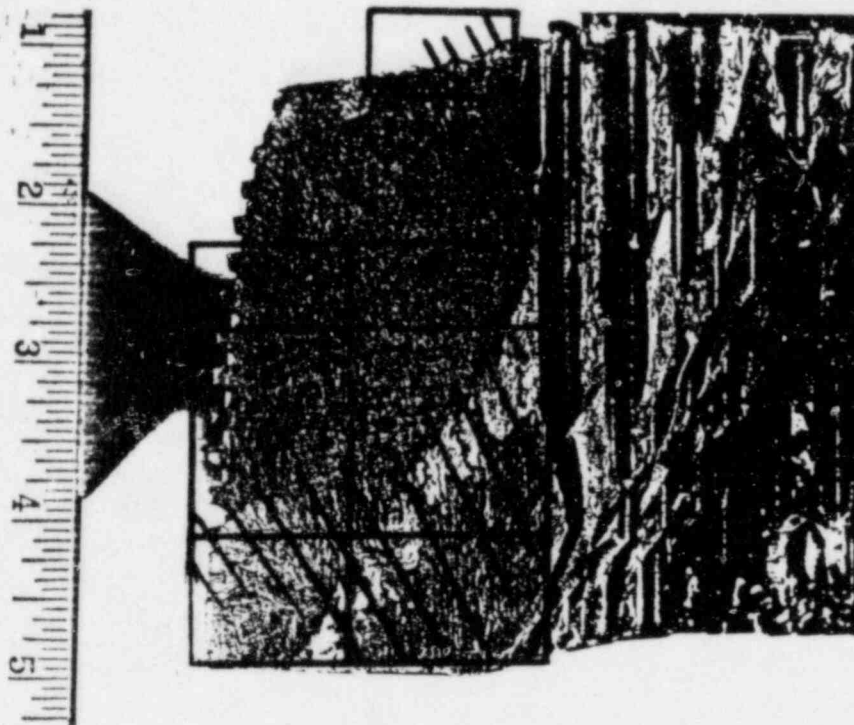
Second fracture face of Section #1, Anchor Head HV 016. Note the striations on the upper two-thirds of the ring fractured face. Origin at lower inner corner of ring. Also note the angled honeycomb fractures.
